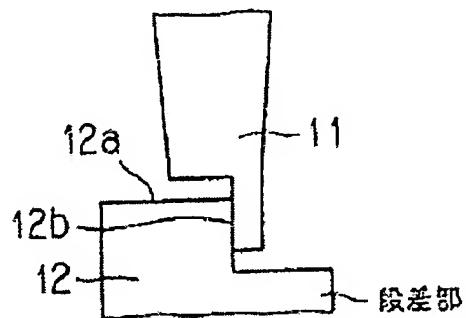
Example that Uses a Receiving Jig Perpendicular Surface of a Groove Section
